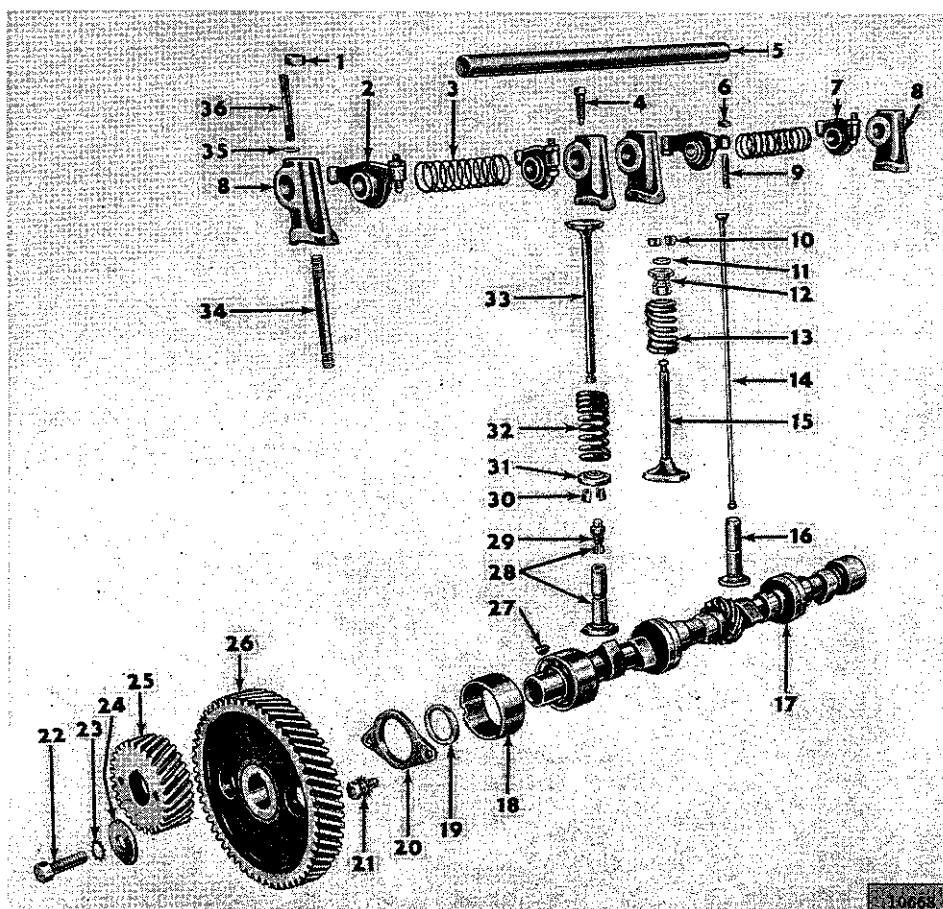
VALVES, CAMSHAFT, AND TIMING GEARS
